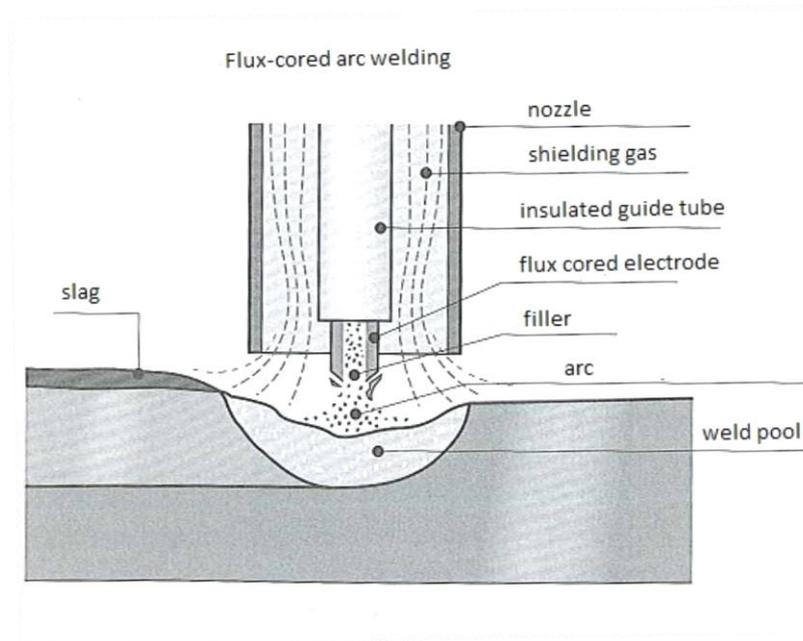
The principle of flux-cored arc welding (Lepola & Makkonen, 2005, p. 138)
